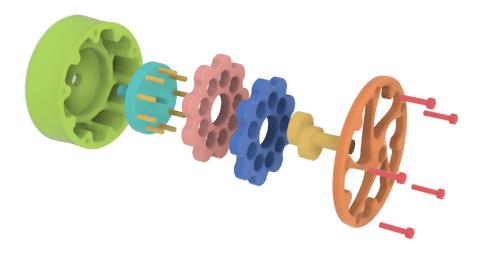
An exploded view of our cycloidal mechanism. It uses two gears on an eccentric shaft to achieve a 10:1 reduction ratio in just one stage.
